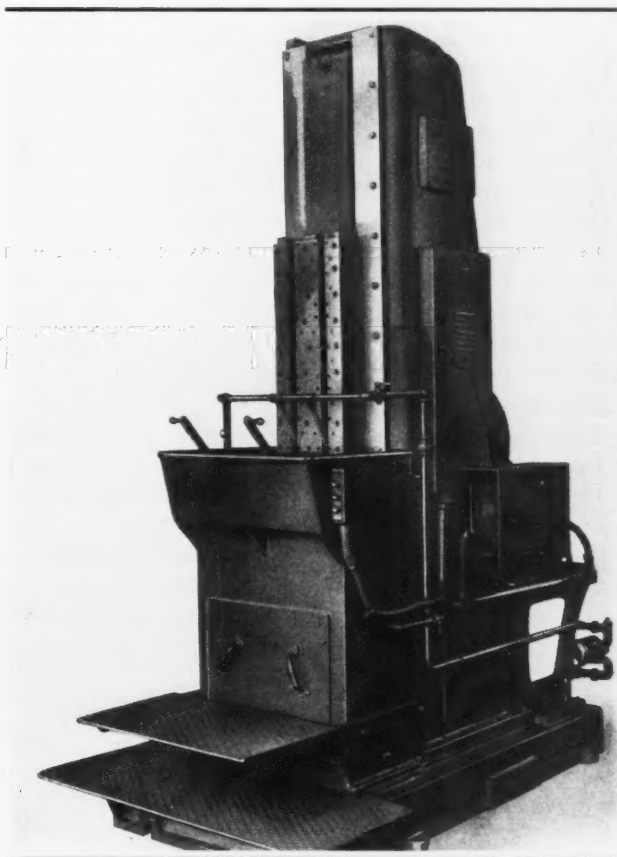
Broaching Machine that Produces Flats on Shackle Pins Used in an Automobile Having no Front Axle
